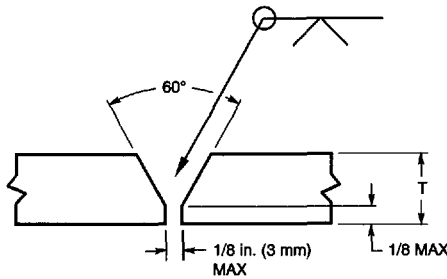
A—Tubular Butt Joint—Welder Qualification—Without Backing
